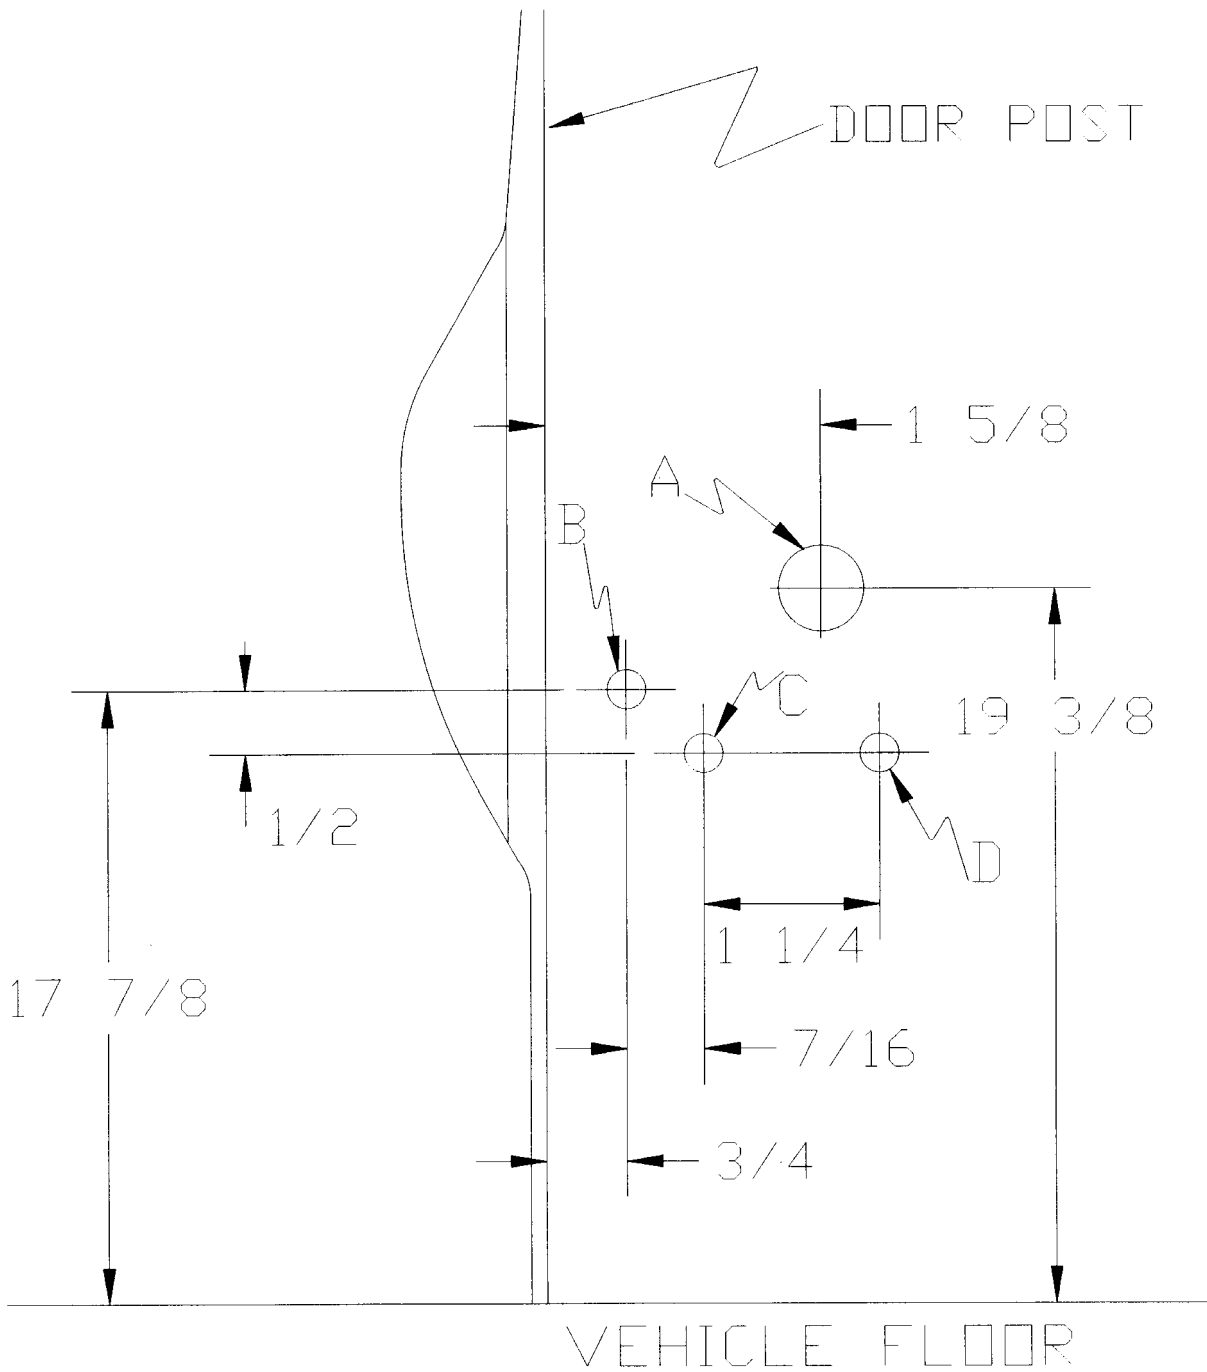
DOOR POST DRILLING DIMENSIONS
